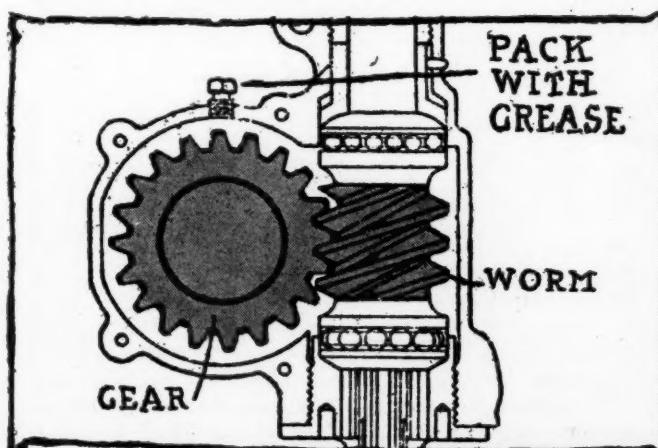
Indicating point in worm and gear steering where grease should be applied.
